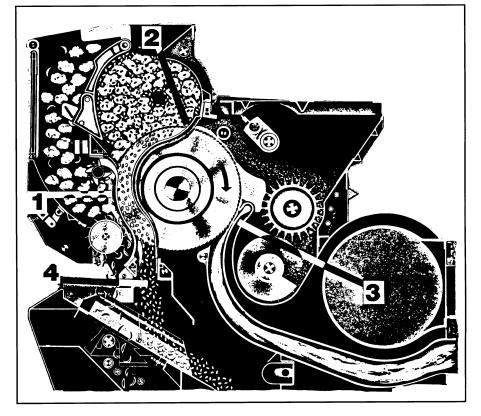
Important settings and adjustments for Consolidated Cotton Gin Company, Inc., brushtype gin (112 and 164 saw). 1, Saw to seed finger assembly, 1-27/32"; 2, Saw to picker roller, 19/32"; 3, Saw to bottom "cut off," running clearance; 4, Brush to "cut off," running clearance; 5, Saw to mote wiper plate tip, 9/32"; 6, Saw to mote bar, 1/8–3/16". Saw speed, 841 rpm; brush speed, 1,799 rpm (courtesy of Consolidated Cotton Gin Co., Inc.).
